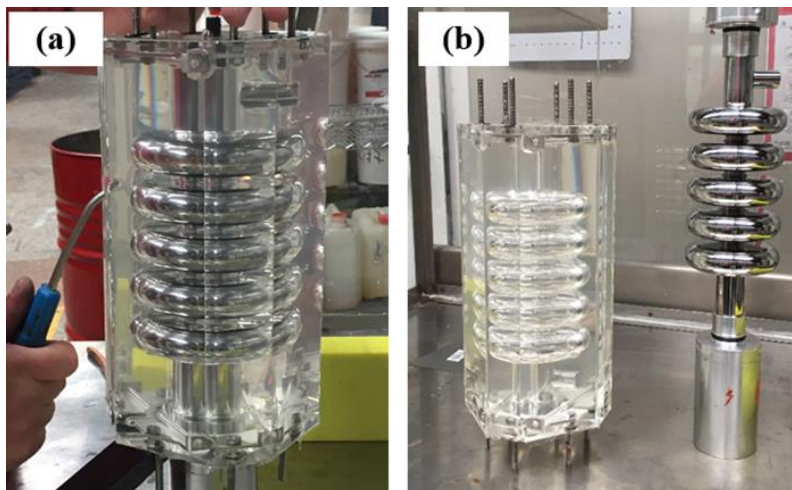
a) Separation of the two parts of the model from the mold. b) The assembled model (left), and the stainless steel mold (right).
